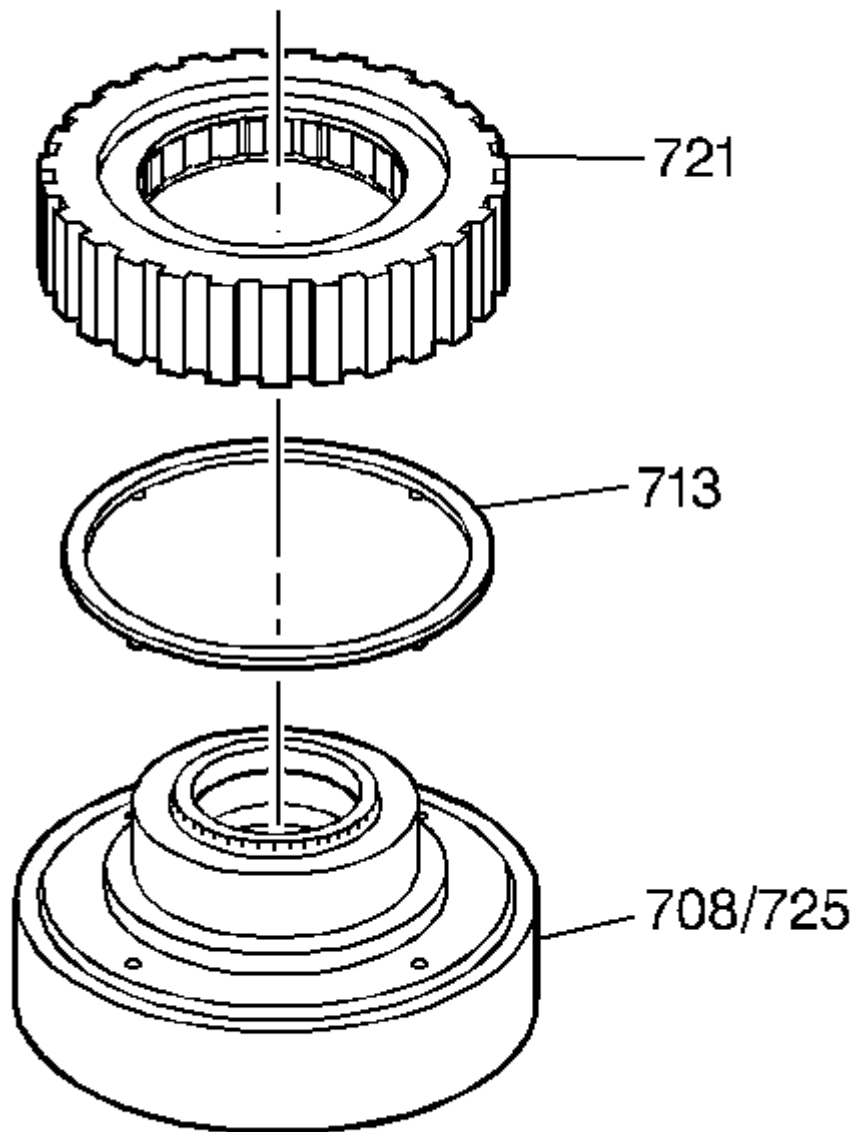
View Of Forward Sprag, Thrust Washer And Input Internal Gear Flange
